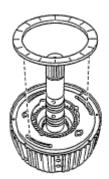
Compressing Seal Rings Courtesy of MAZDA MOTORS CORP.
